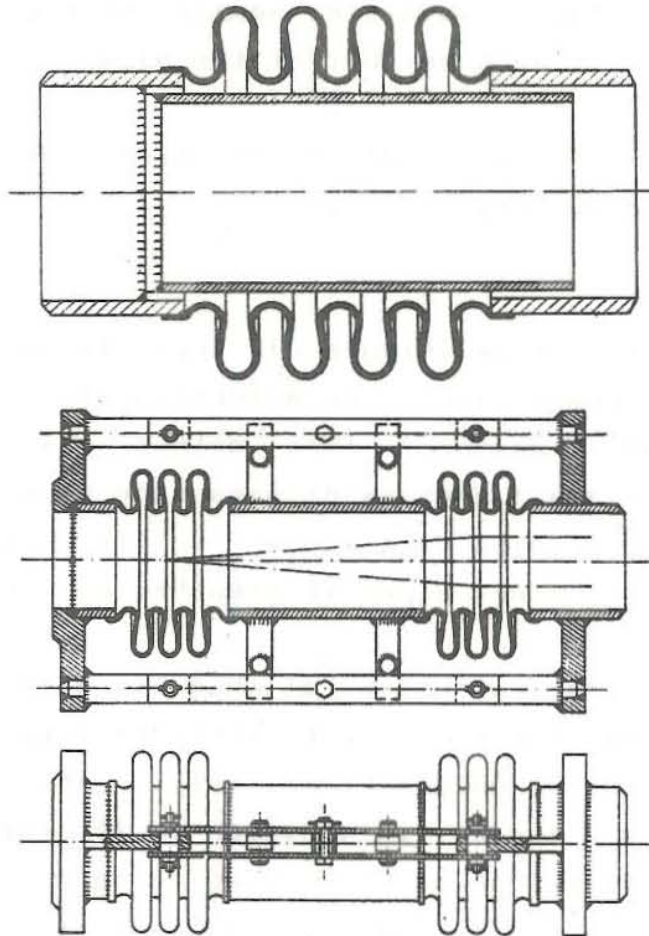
Top: Axial compensator with welding ends and internal sleeve.
